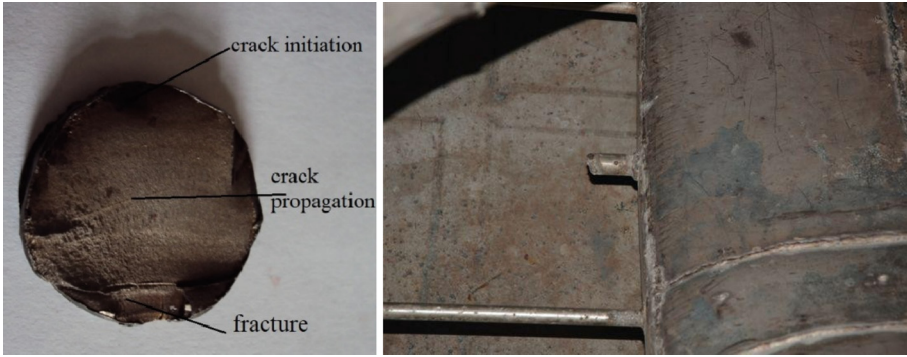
Fatigue fracture of the stiffness rod.
